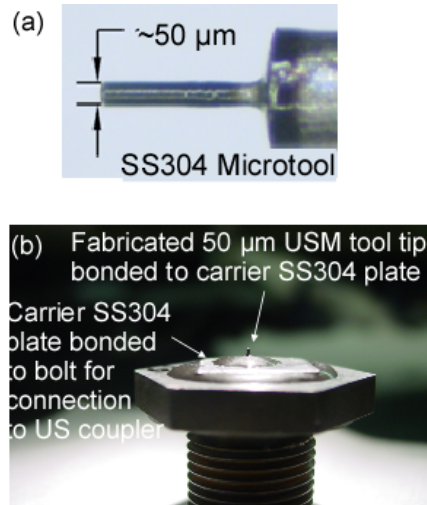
(a) Photograph of a fabricated 50- μm diameter micro-tool. (b) The micro-tool bonded to the USM bolt using STYCAST epoxy. This bolt is screw fitted into the horn.
